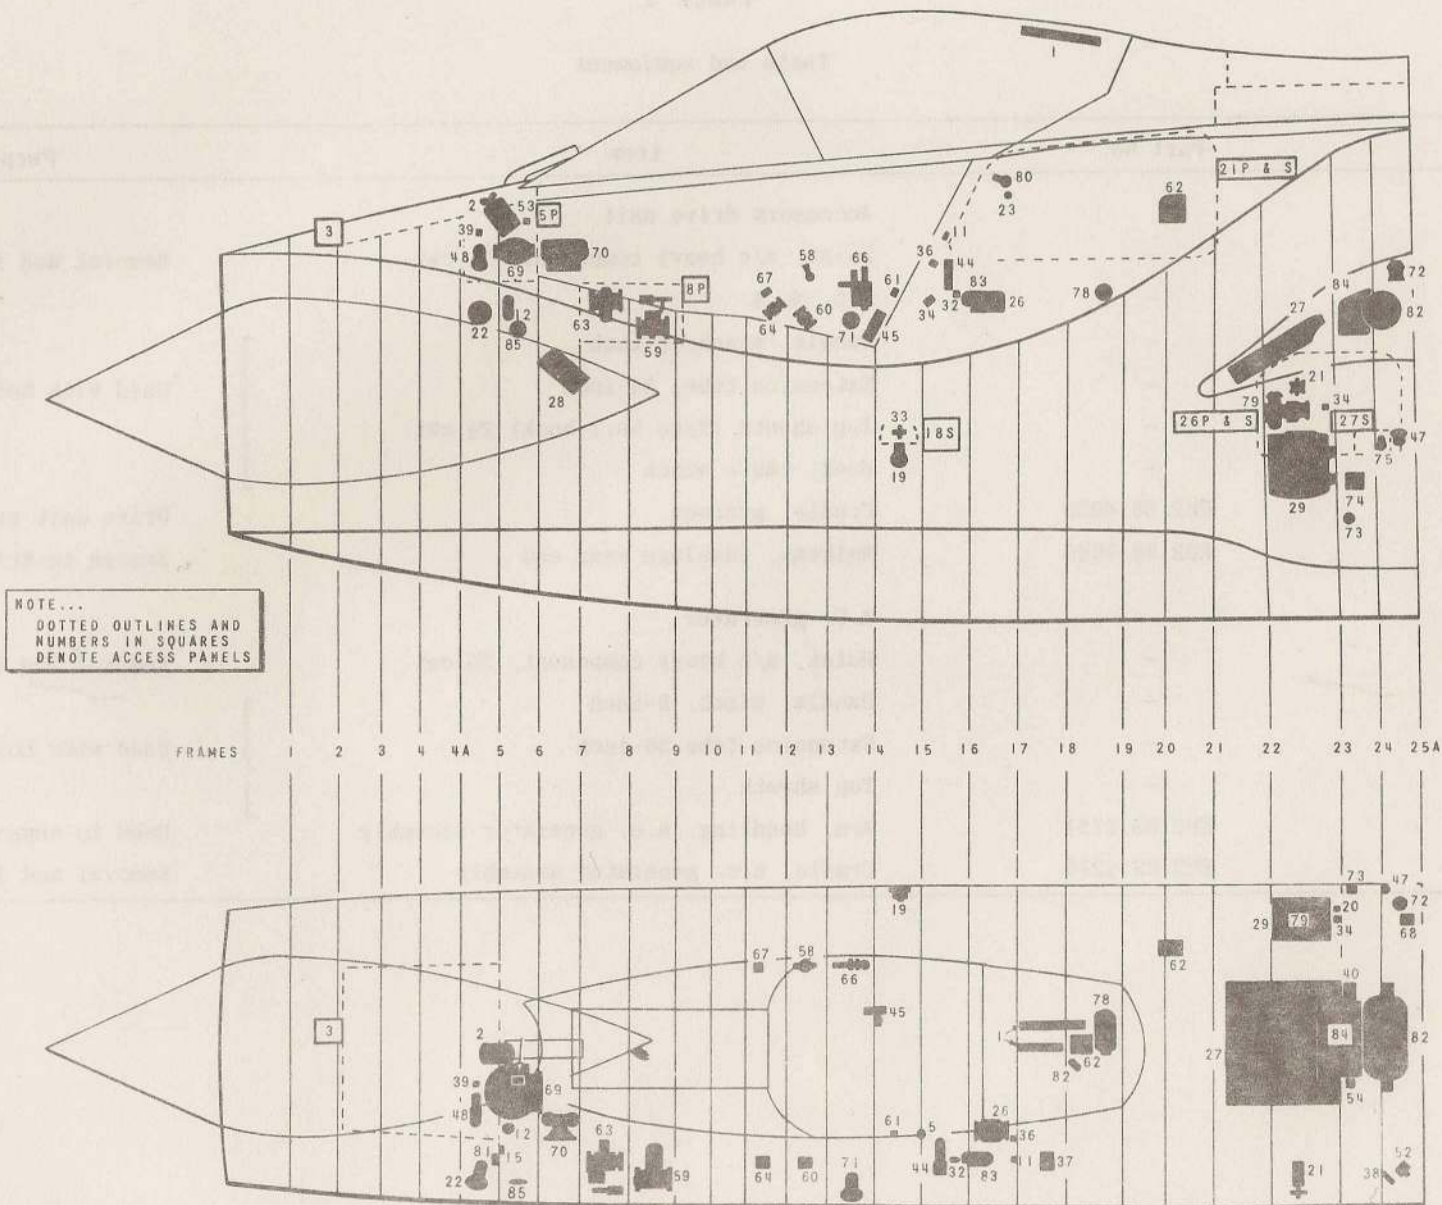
LOCATION OF MAJOR COMPONENTS-FRAMES 1-25A
